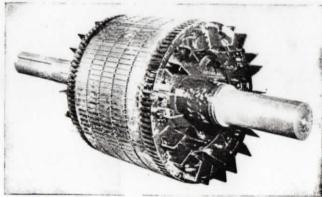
Squirrel cage rotor with brazed bars. (General Electric Company)
